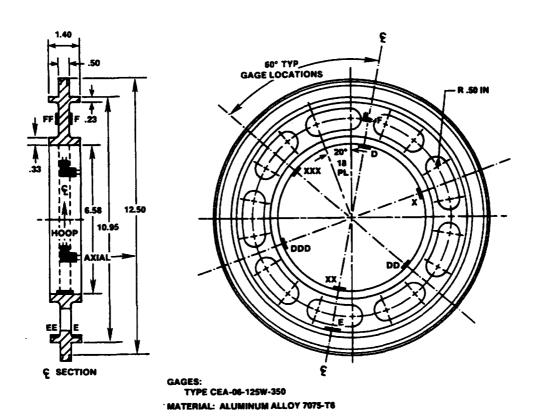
Aluminum ring stiffener DWG 0121605; location of gages.
